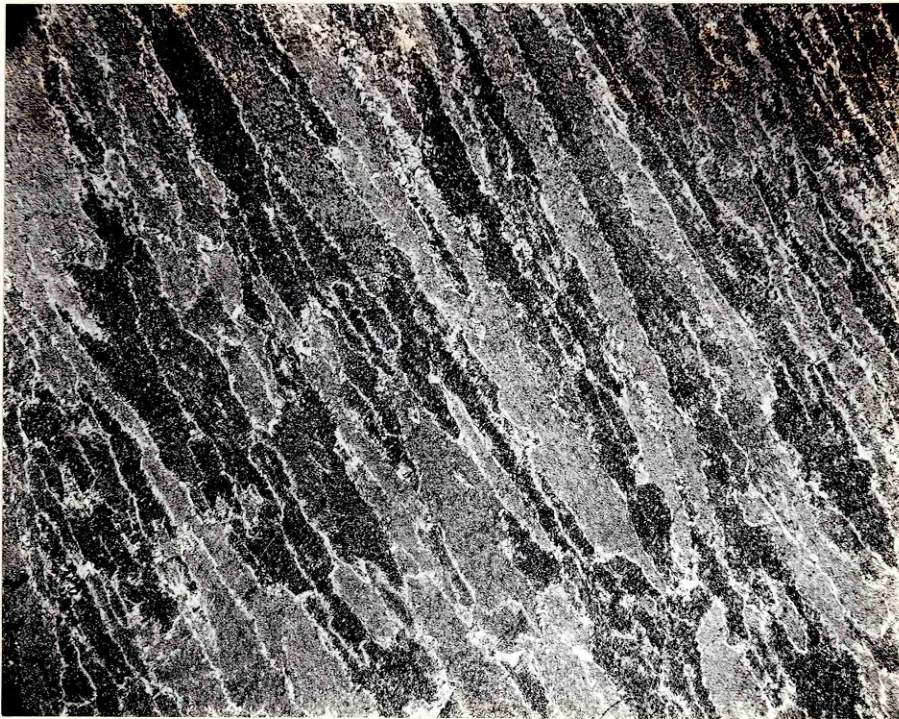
Weld 650 amp - 200 mm/min. Sub-Surface
